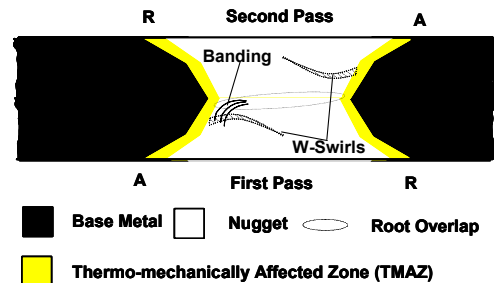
Joint profile in double-sided FSW weld joint. The HAZ could not be discerned. "A" and "R" indicate advancing and retreating sides, respectively. 0.25 in. thick AL-6XN steel plate.
